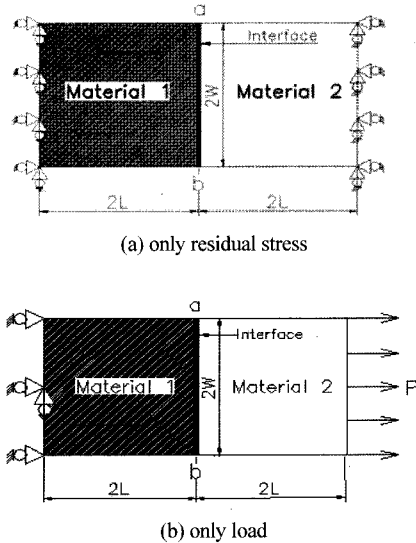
Model of BEM analysis on friction welded dissimilar materials
